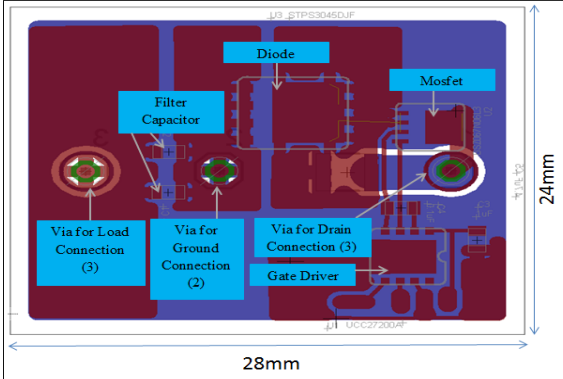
Layout of PCBs for proposed buck converter package (Red-Top Layer, Blue-Bottom Layer)
